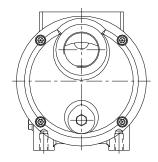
Oil-water cooler type TAK/T series 27 and 28
